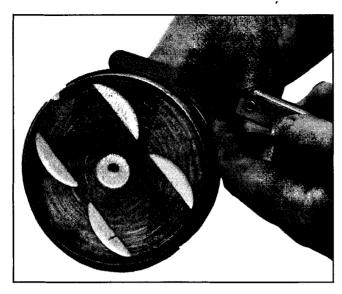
Measuring Side Clearance of Ring in Groove
